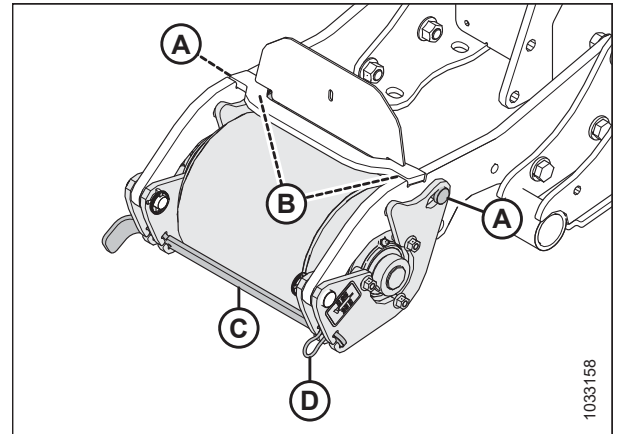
Gauge Roller Secured in Intermediate Working Position
